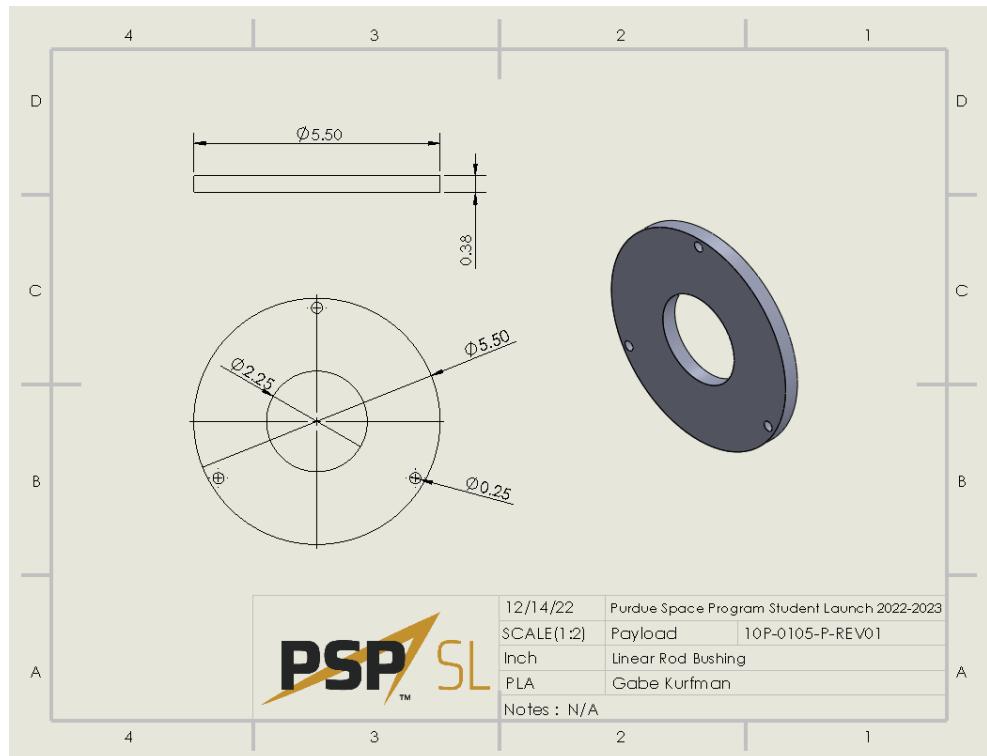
IOS Linear Rod Bushing Technical Drawing
